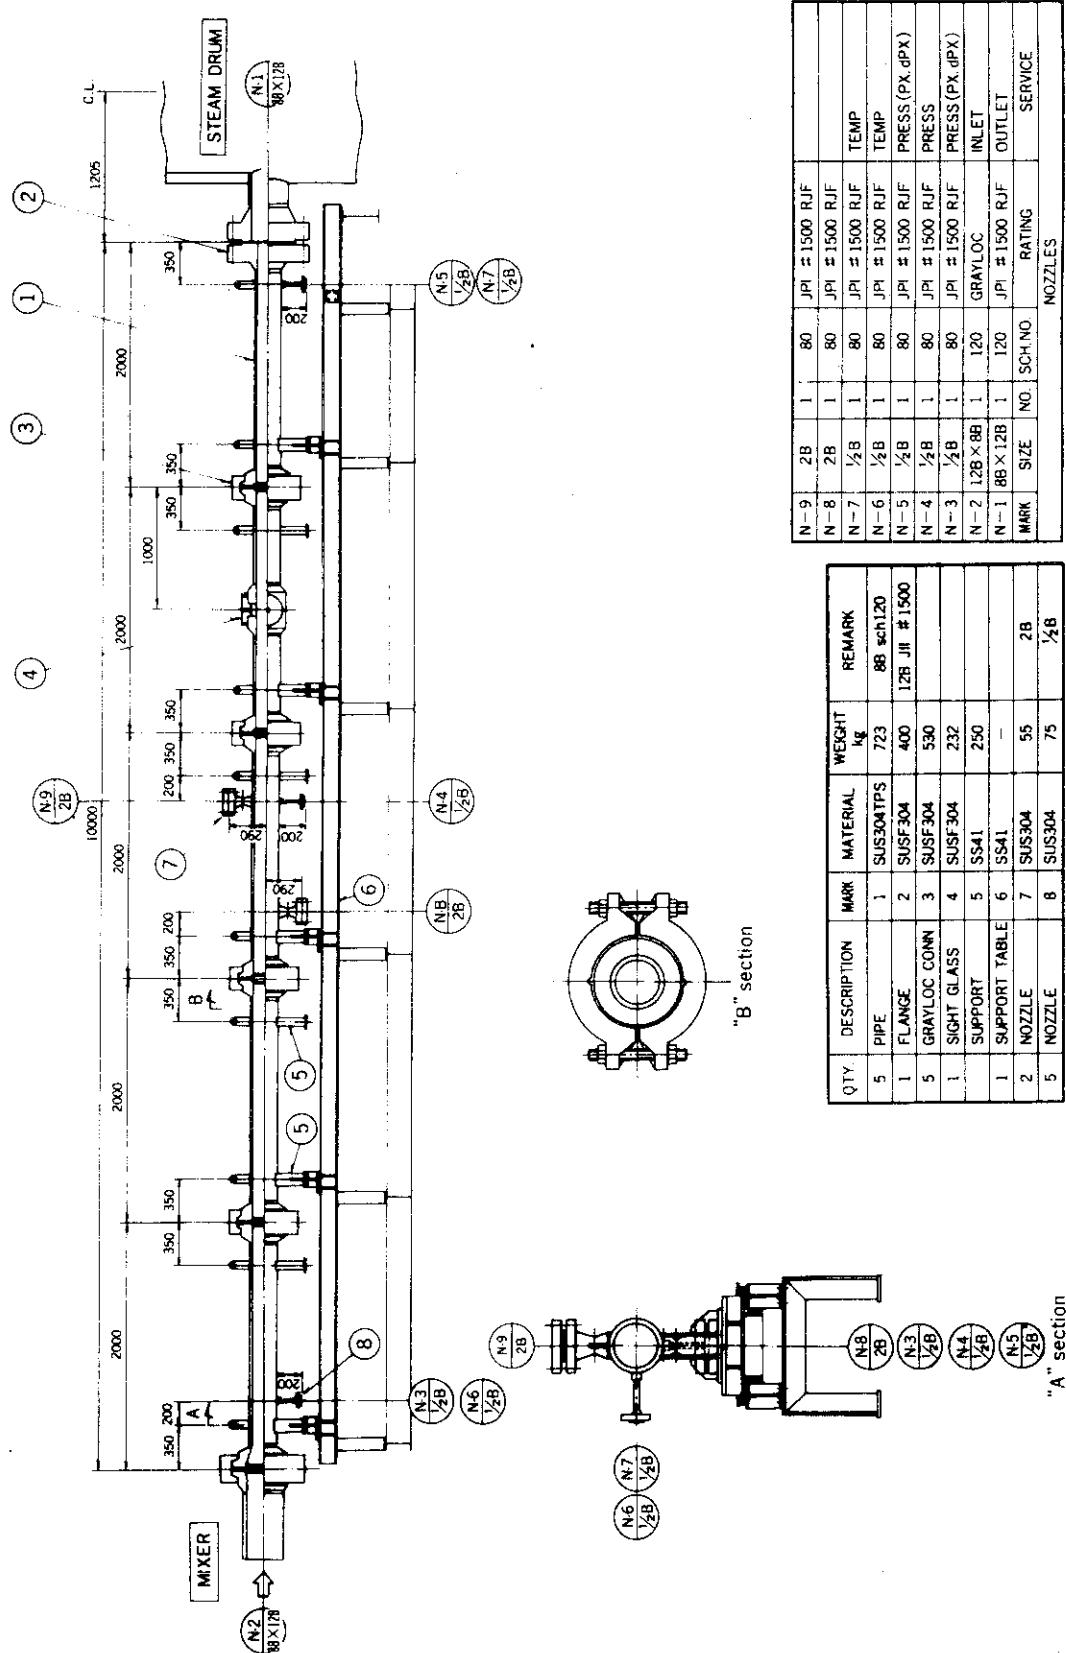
Horizontal Pipe Test Section (TS-3)
